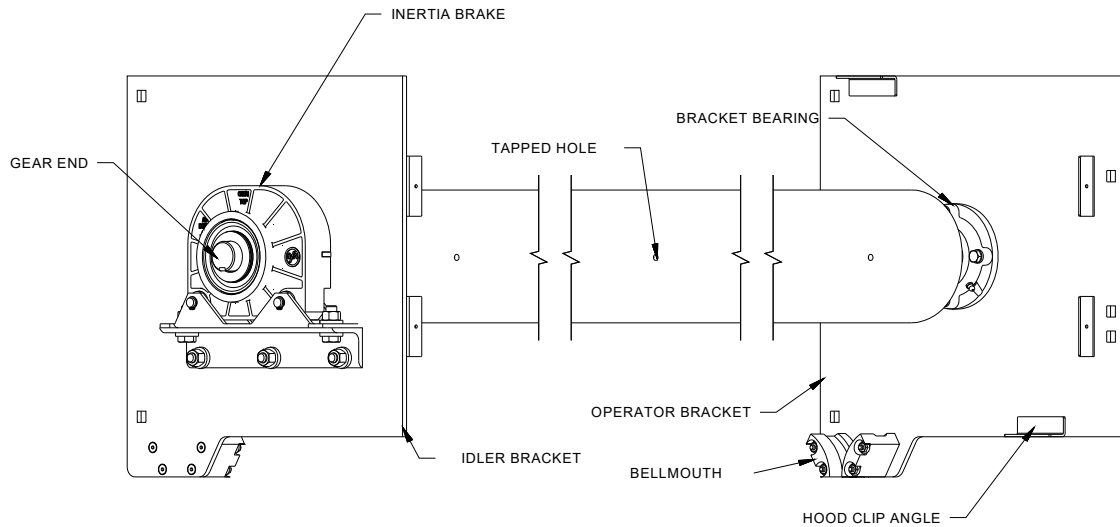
“Idler” Bracket Attachment (right hand operation shown)
